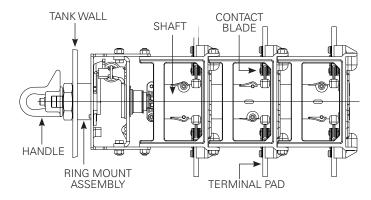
Line illustration of loadbreak switch with ring mount assembly.
